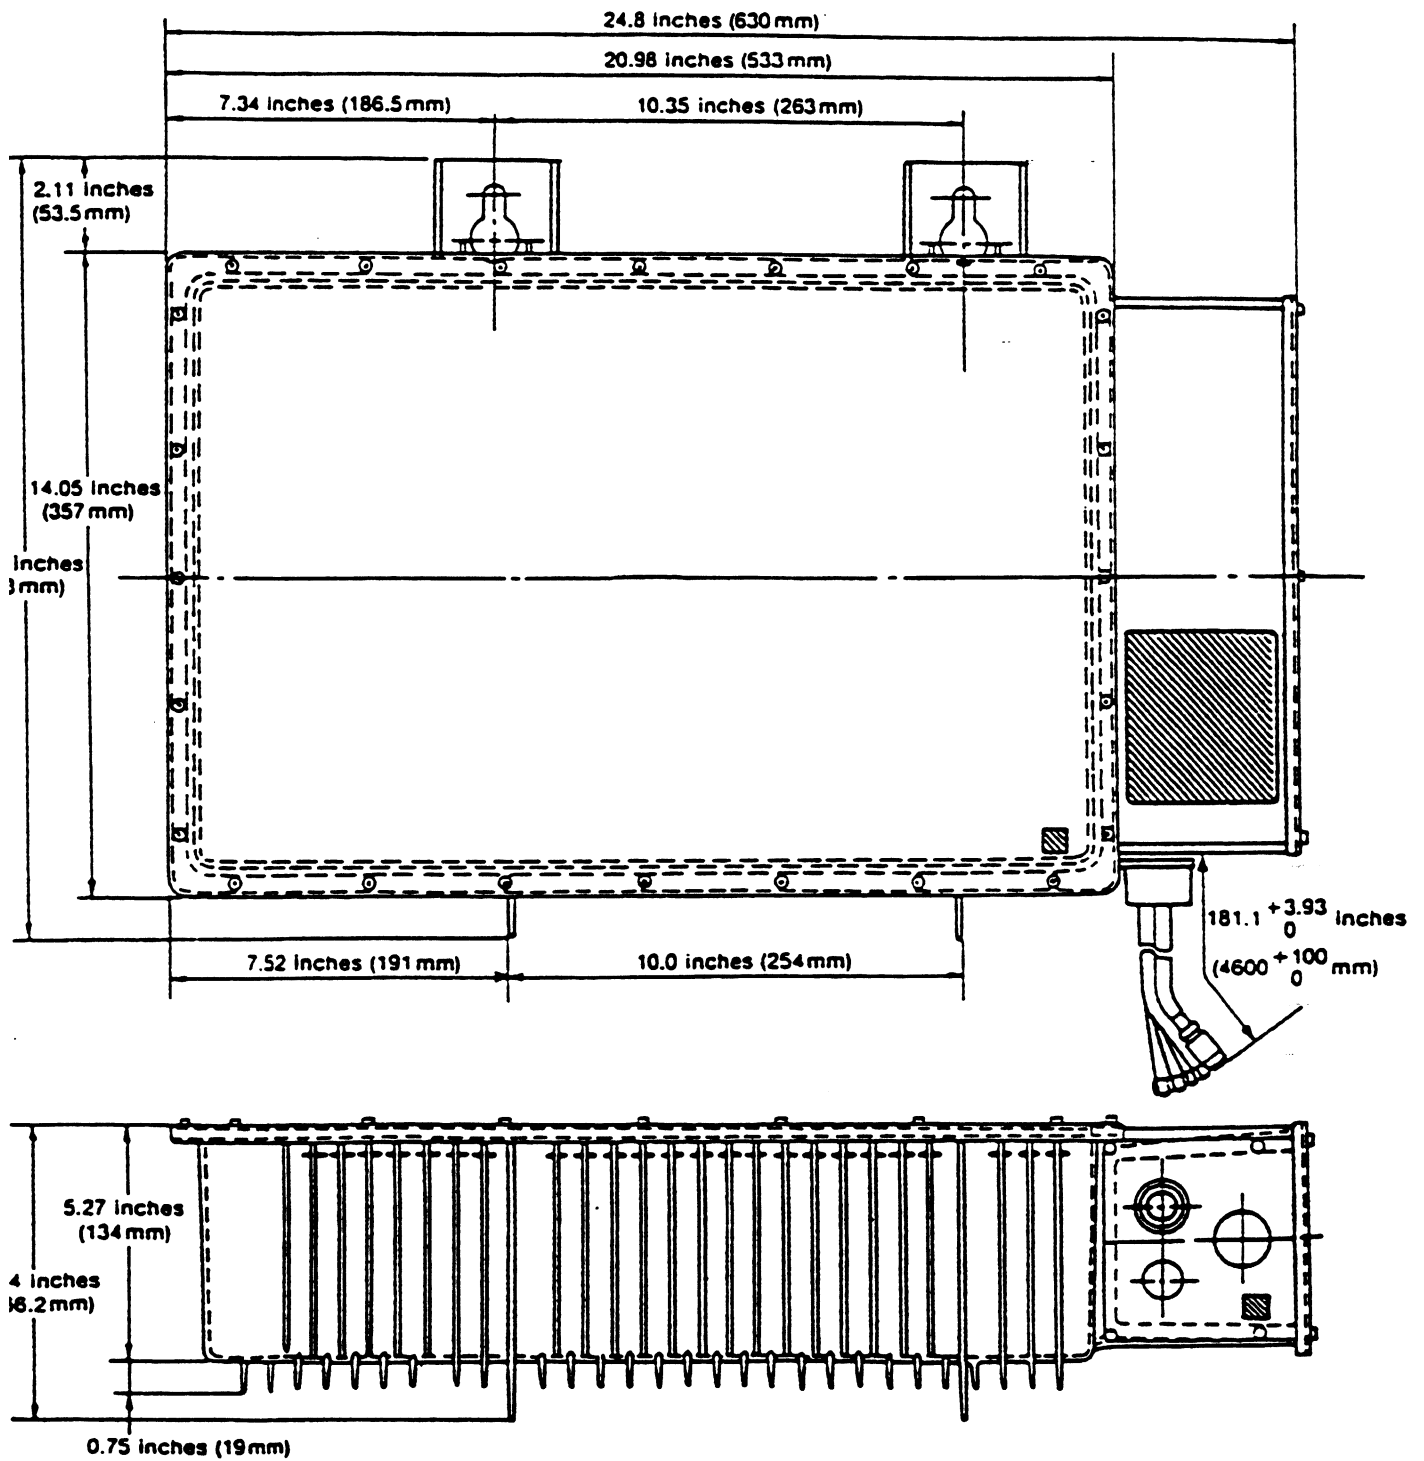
IF Electronics Assembly Mounting Dimensions
